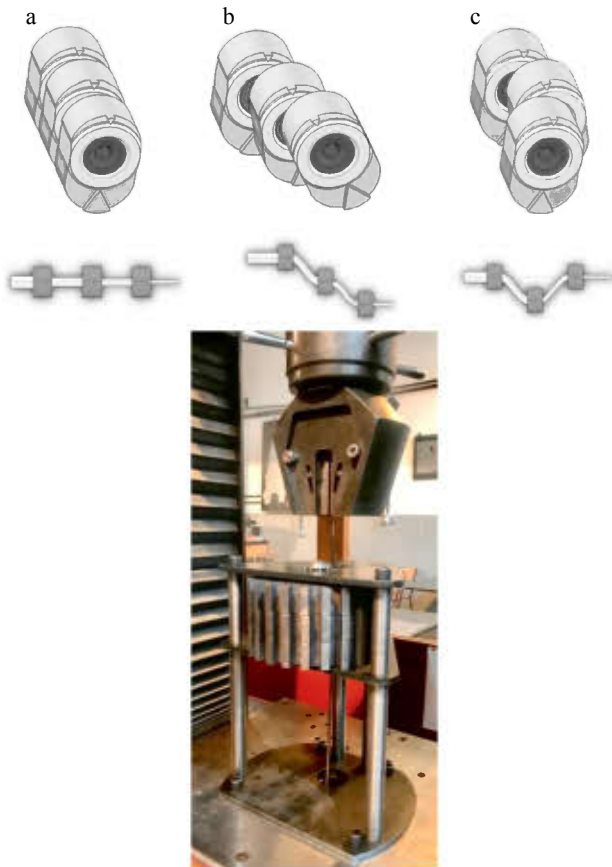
Drawing dies arrangements: (a) linear; (b) stepped; (c) cranked; (d) installed AAD system on Instron 1196 frame.
